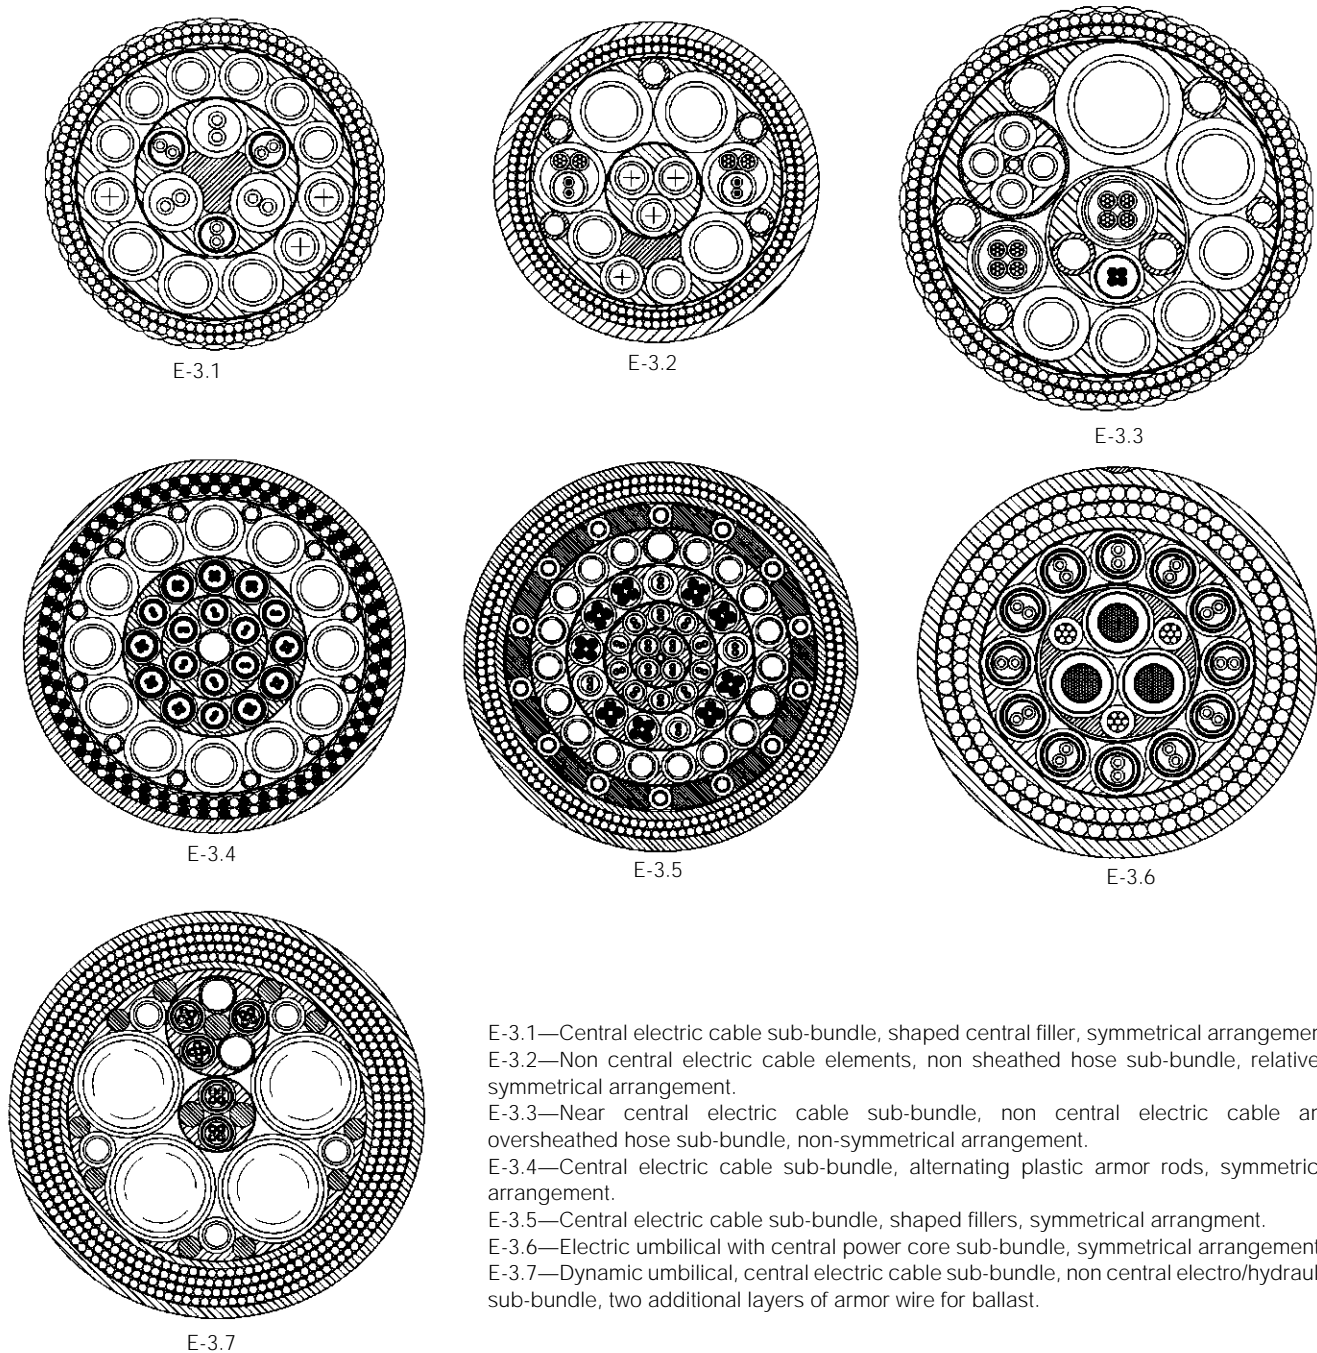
Typical Umbilical Cross Sectional Arrangements
